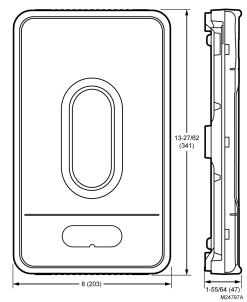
TAZ-4H panel dimensions in in. (mm).
